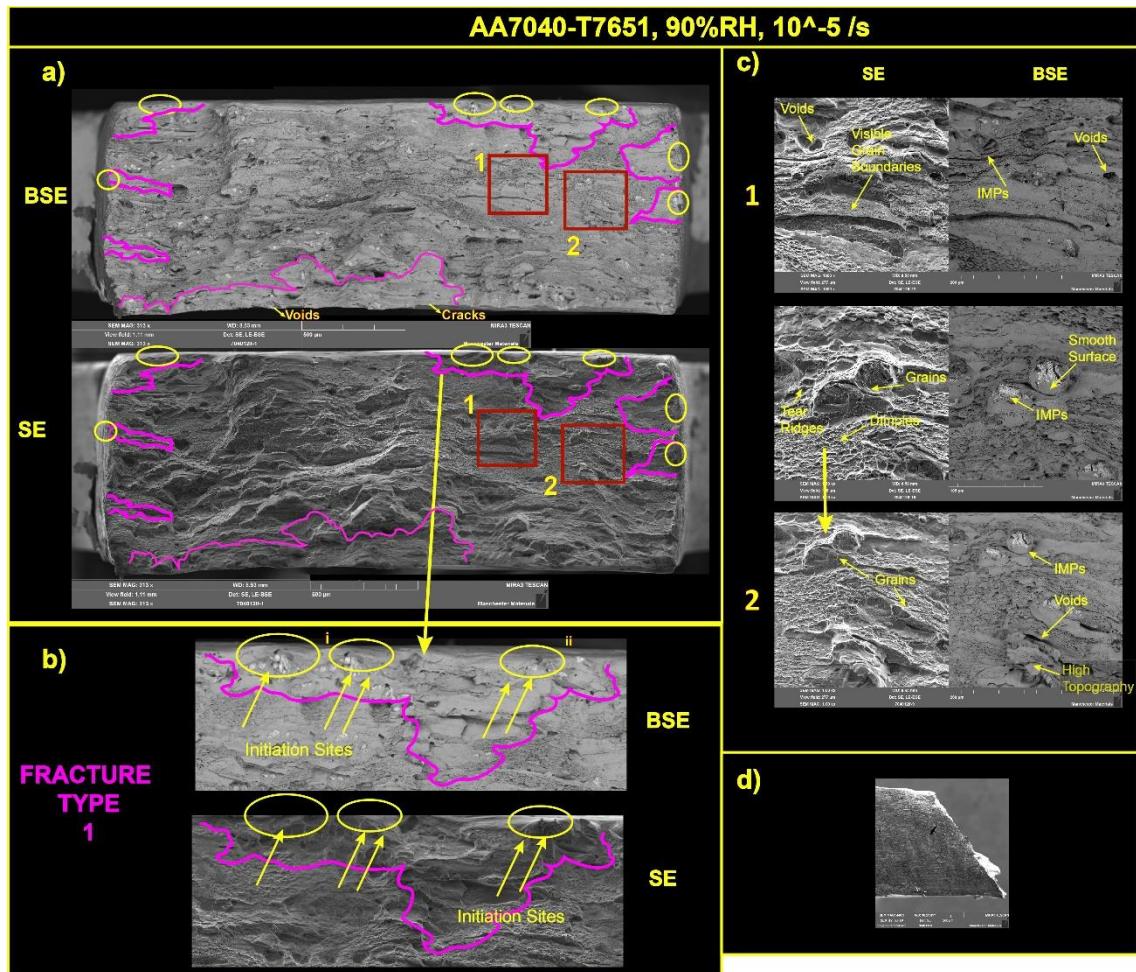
Sample 2 fracture surface SEM images AA7040-T7651 alloy showing a) an overview of the fracture surface displaying intergranular fracture, b) Fracture Area “Type 1” pointing possible initiation sites, c) areas of interest displaying fracture features characteristics and d) lateral fracture view.
